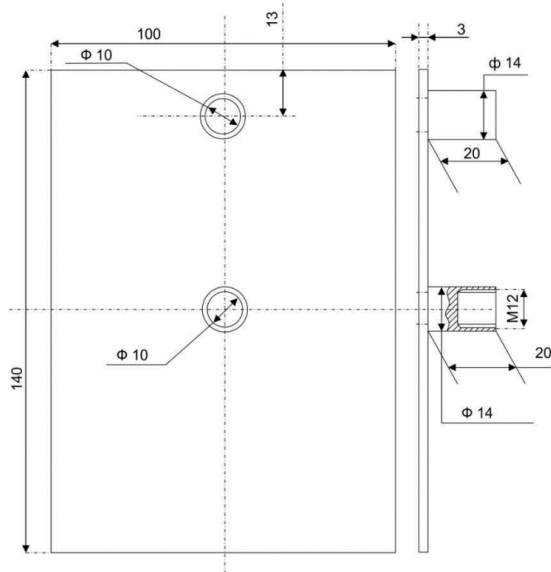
Wall (side) with connections for pressure gauge and thermocouple
